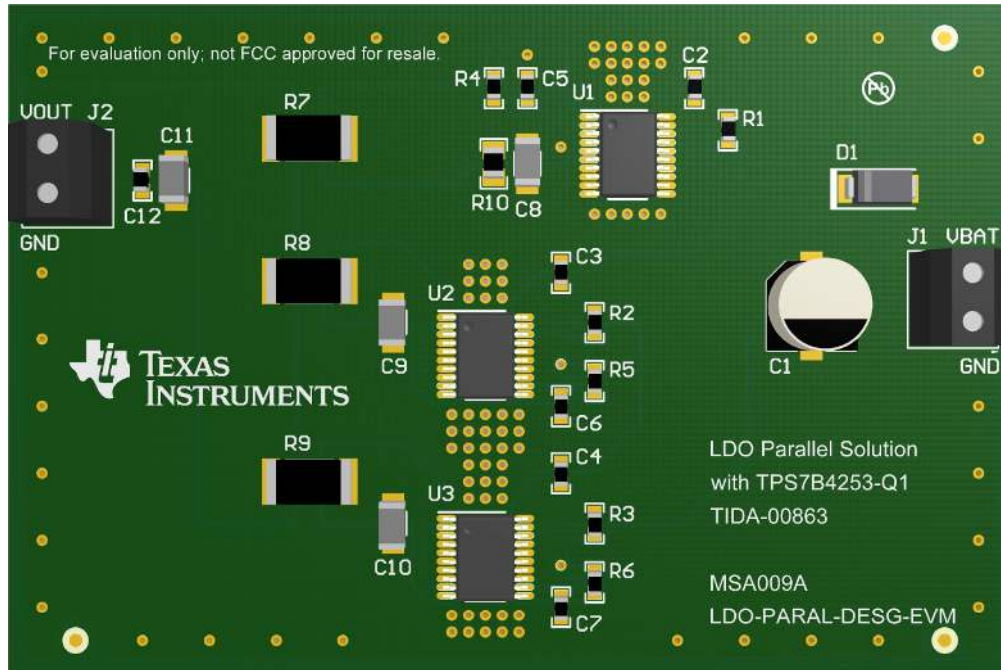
LDO Parallel Design EVM Component Placement (Assembly Top View)
